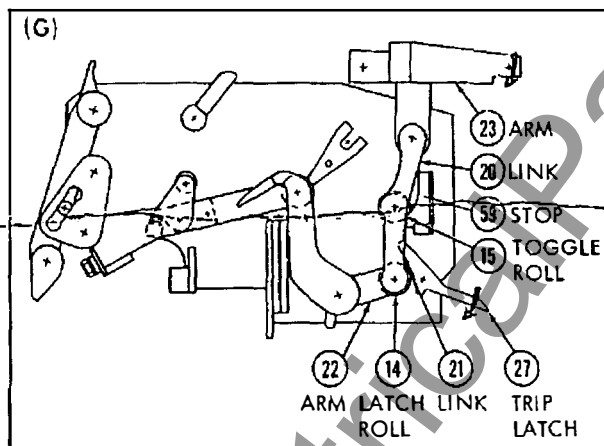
Fig. G - Breaker Opening, Springs Charged. To open the breaker, trip latch (27) is rotated by depressing latch, releasing latch roll (14). Arm (22) rotates about its center, allowing links (20, 21) to drop. This rotates arm (23) about its center, opening the breaker. Toggle roll (15) is forced back by the curve of stop (59), breaking the over toggle of links (20, 21) and allowing them to reset. This rotates arm (22) back into reset position with latch roll (14) back of latch (27).
